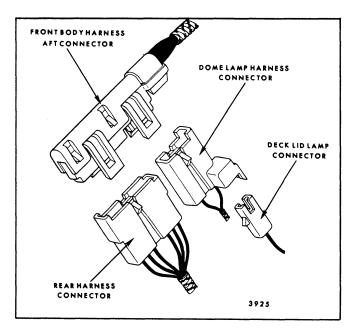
Front Body Harness - Aft Connector - "F" Style
